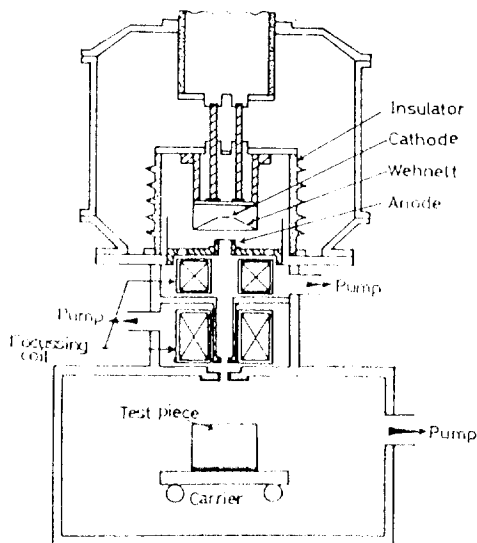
Schematic diagram of 100KV, 100KW E.B. welder.
